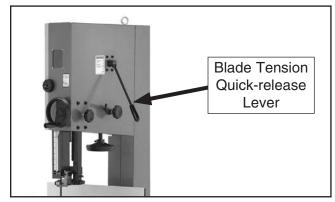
Blade tension quick-release lever (G0513X2 shown).
